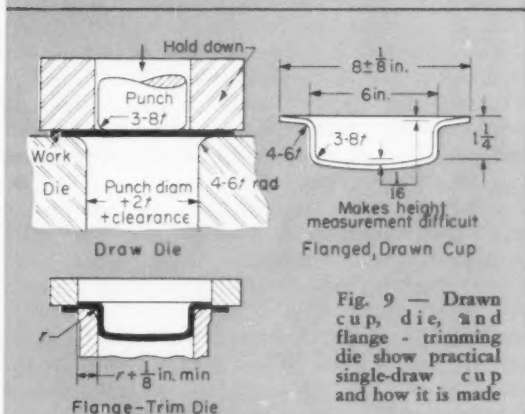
Drawn cup, die, and flange - trimming die show practical single-draw cup and how it is made
